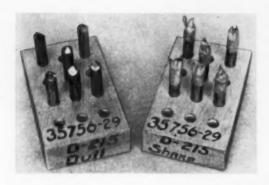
These blocks make it more profitable to grind a number of tools simultaneously, eliminate setting up a grinder when a sharp tool is needed. Pratt & Whitney uses them for Heald and Ex-Cell-O Boring and Turning machine tools.
